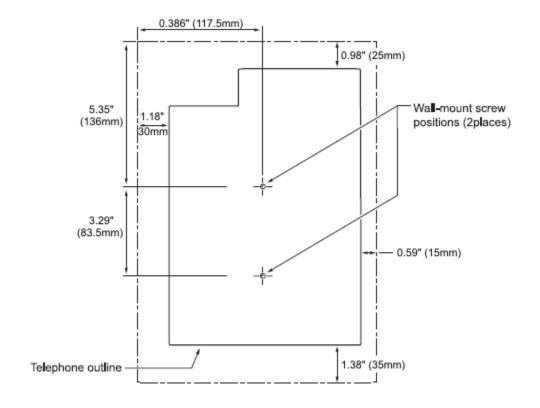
Wall Mount Spacing Guide BCH-L (BK) UNIT
